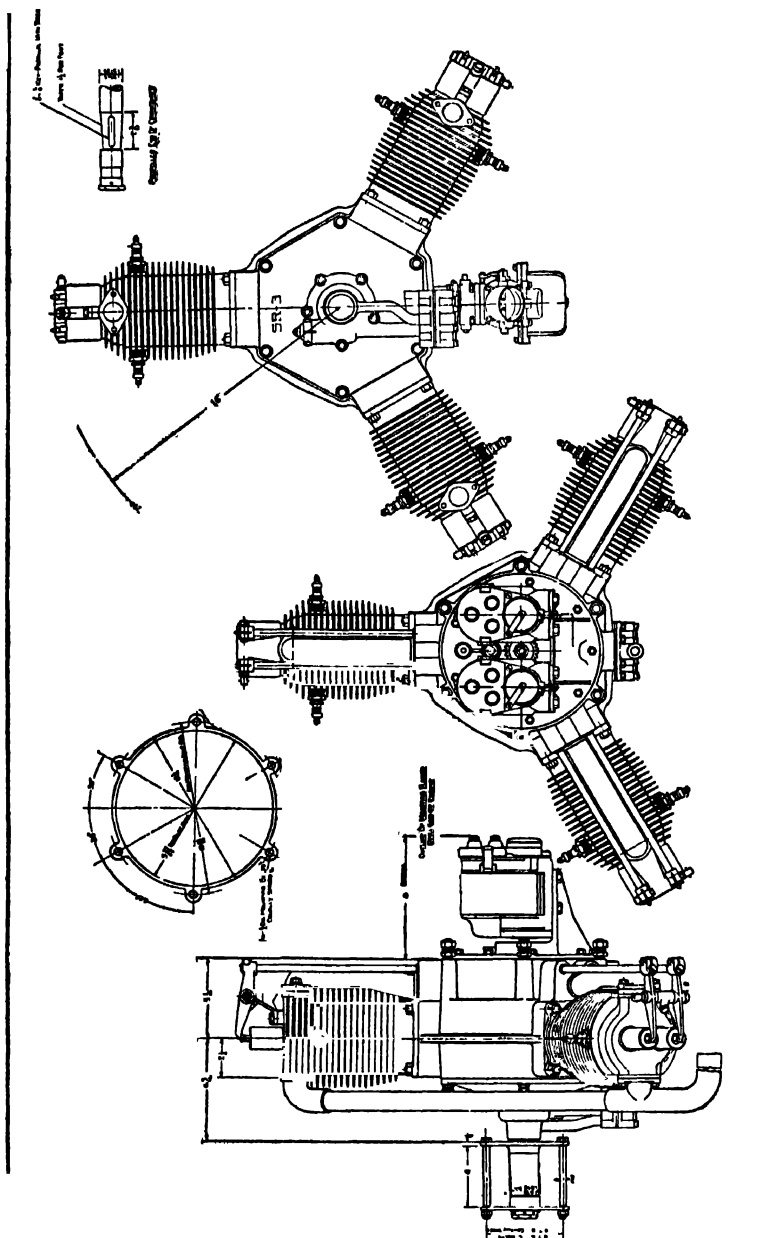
Installation Drawing of Szekely Airplane Engine.
